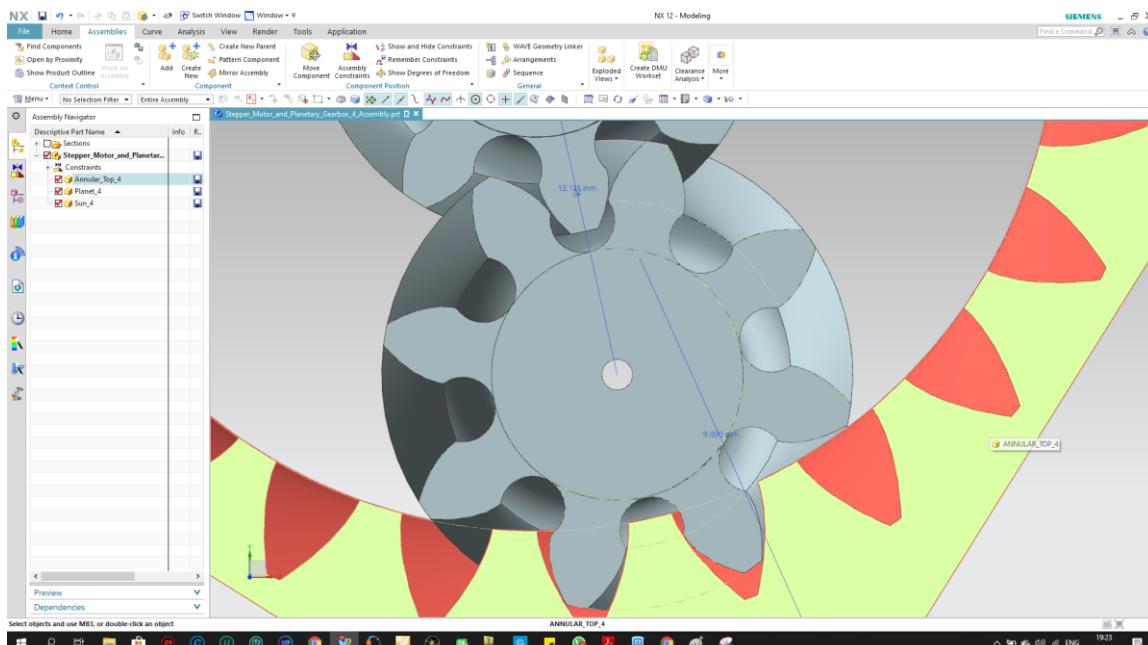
Final Meshing Profile of Annular, Planet and Sun Gear
